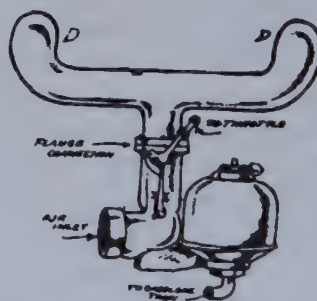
A Carburetor Attached to the Intake Manifold Vertically.
